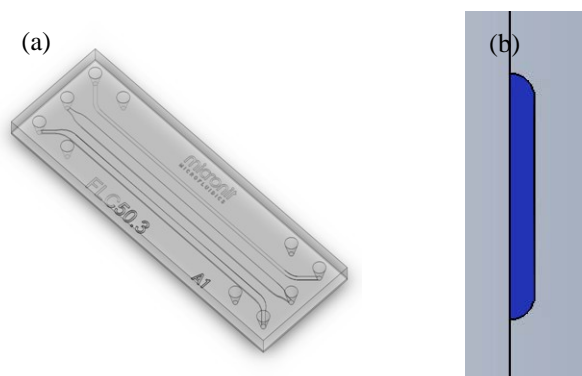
Microfluidic chip with microfractures (a) and cross-sectional view of a single fracture (b)
